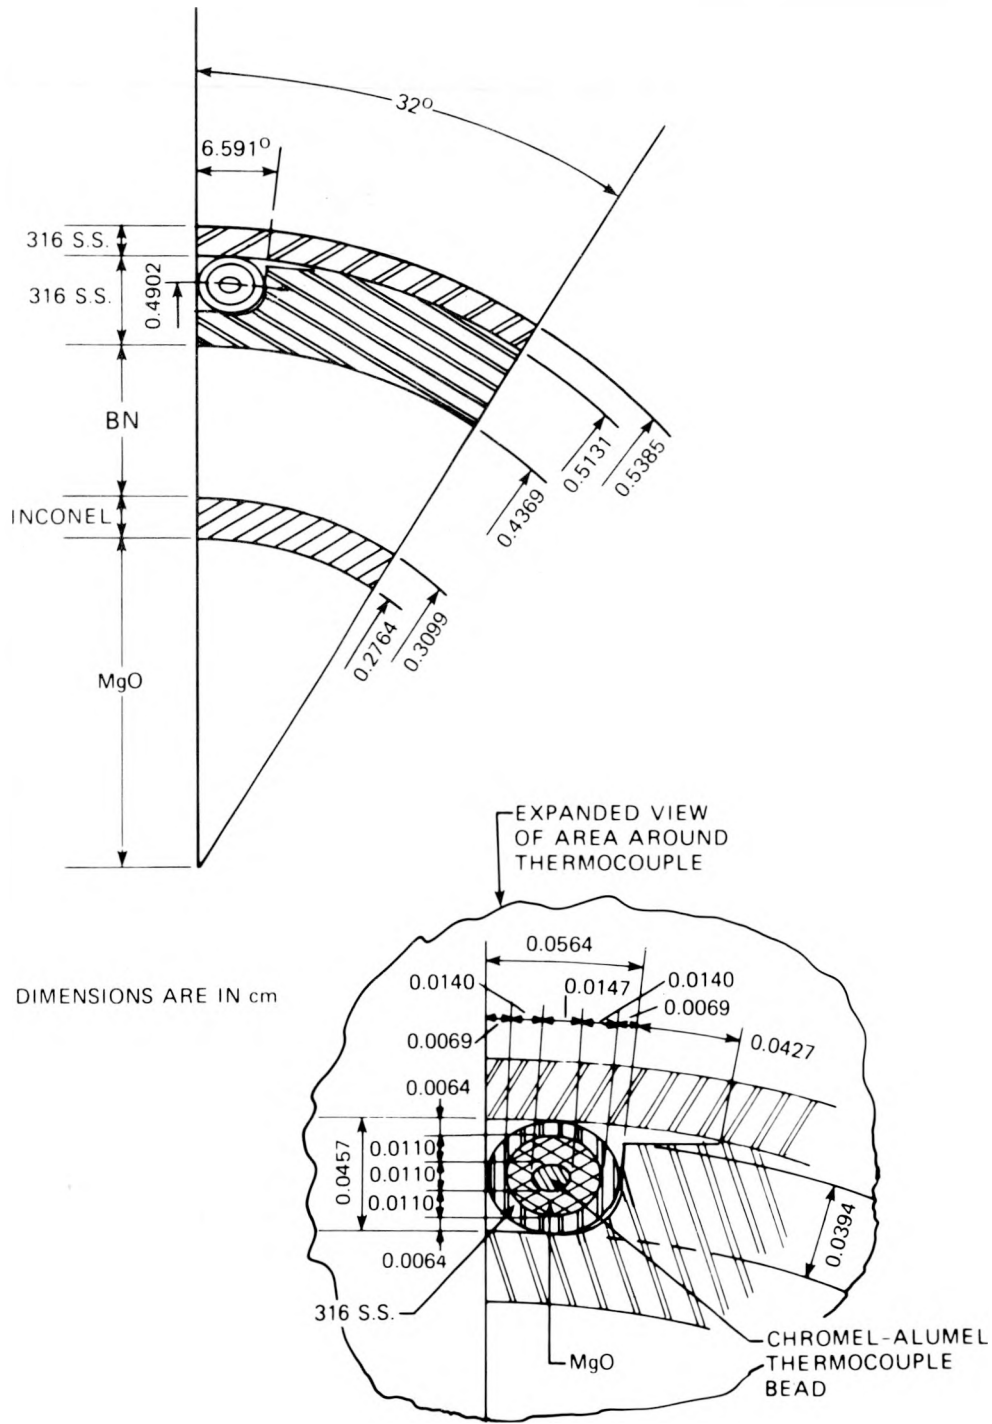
Segment of heater showing mean dimensions in the thermocouple area (1 in. = 2.54 cm).
